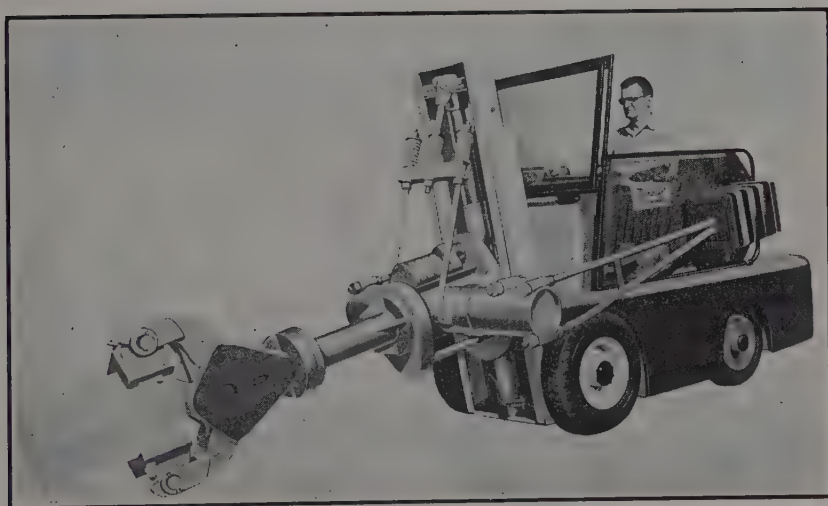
Furnace charger. Courtesy of Salem-Brosius.
